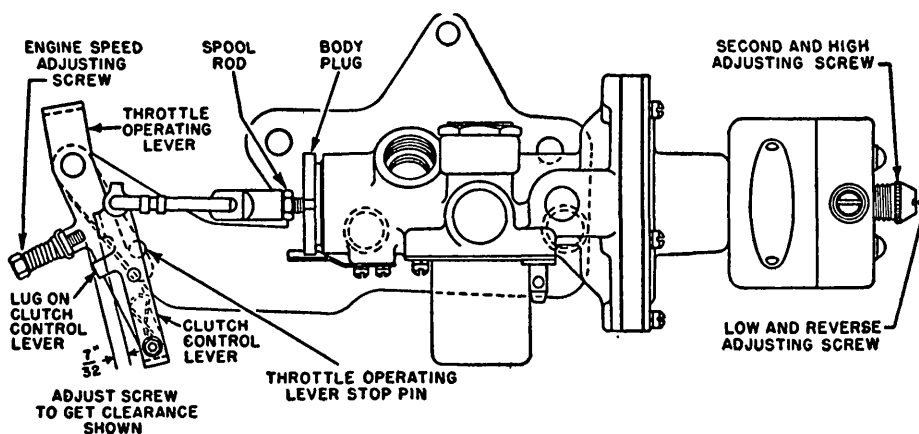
Principal points of adjustment of clutch control valve, 1941-42
